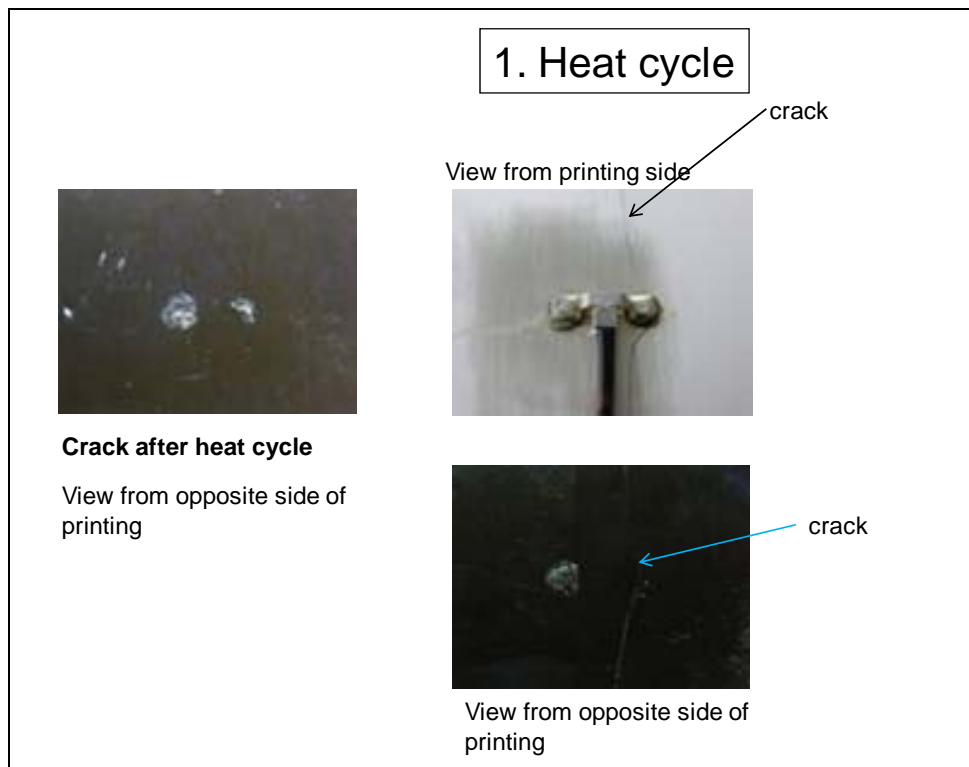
4: failure of non- toughened glazing structure (LF soldered) after heat cycle.
